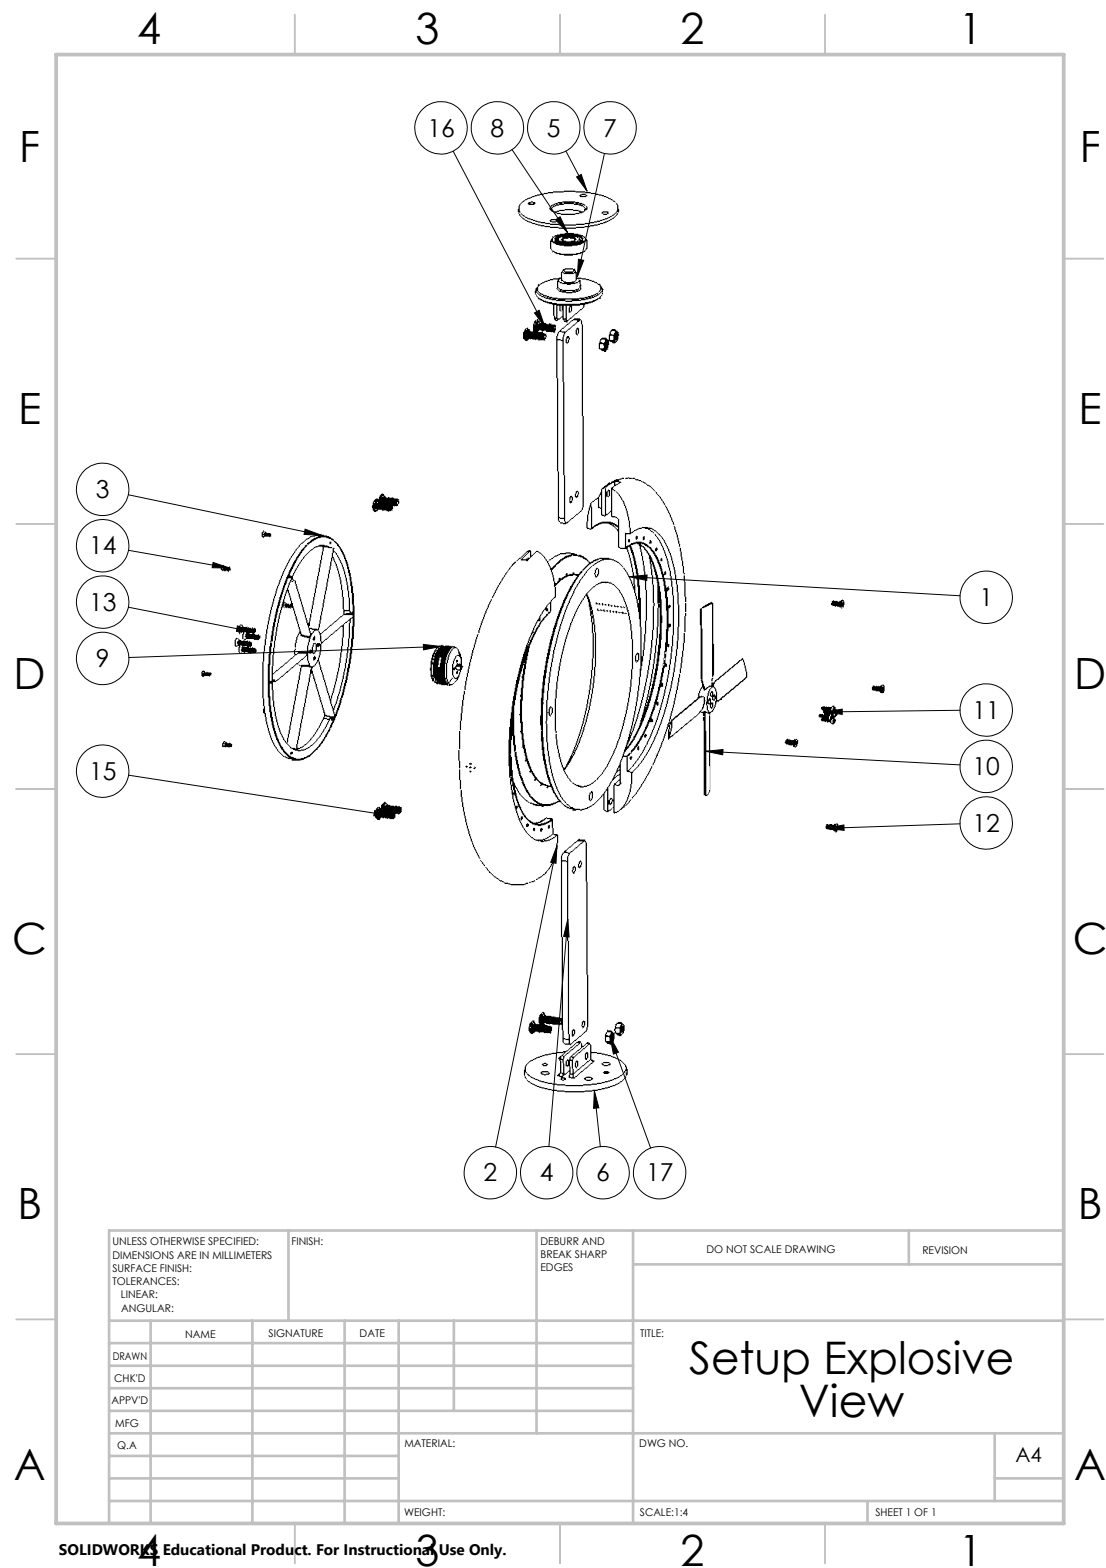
Shrouded Rotor Setup Explosive Drawing
